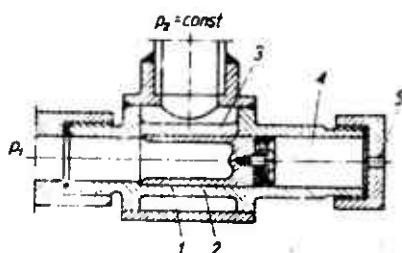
Pressure reducing valve of the programed regulator type: 1) piston; 2) cylinder; 3) compressed air inlet orifice whose area is regulated; 4) fluid resisting piston travel; 5) liquid exhaust orifice.
